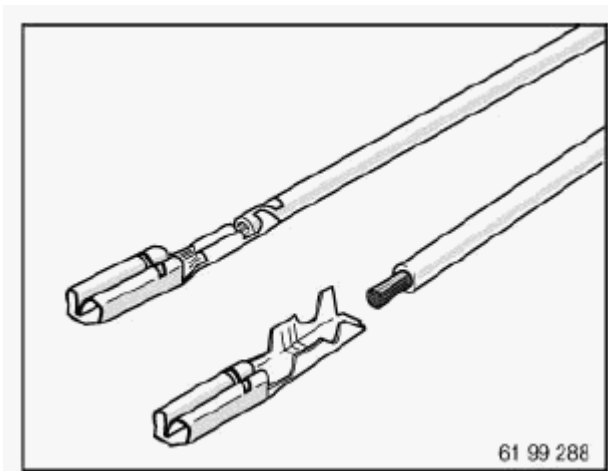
Identifying Crimp Contact Sleeves On Wire Ends
